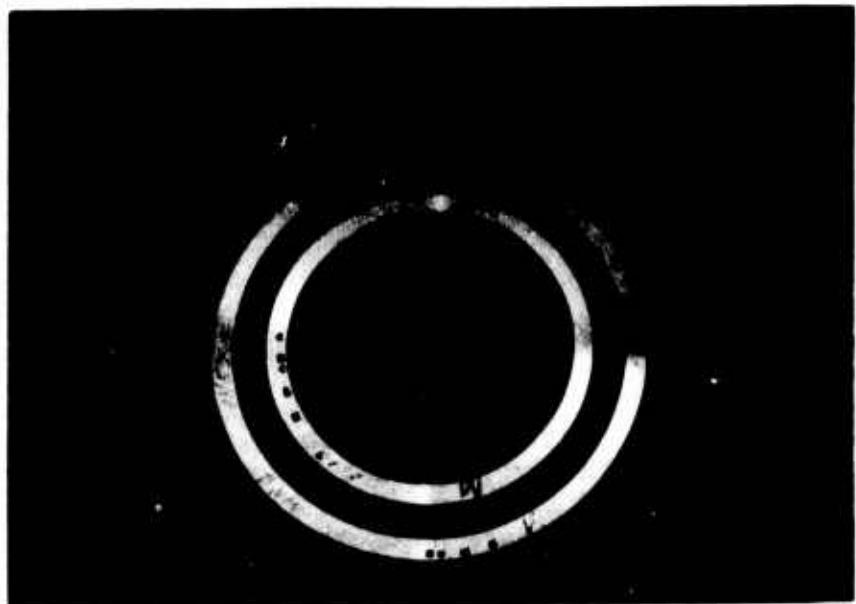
Bearing S/N E13 Before Test (SP-21 Insert Design).
